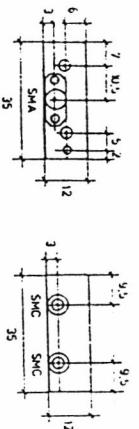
Dimensioned sketch of the end panels of DL1RQ 670
